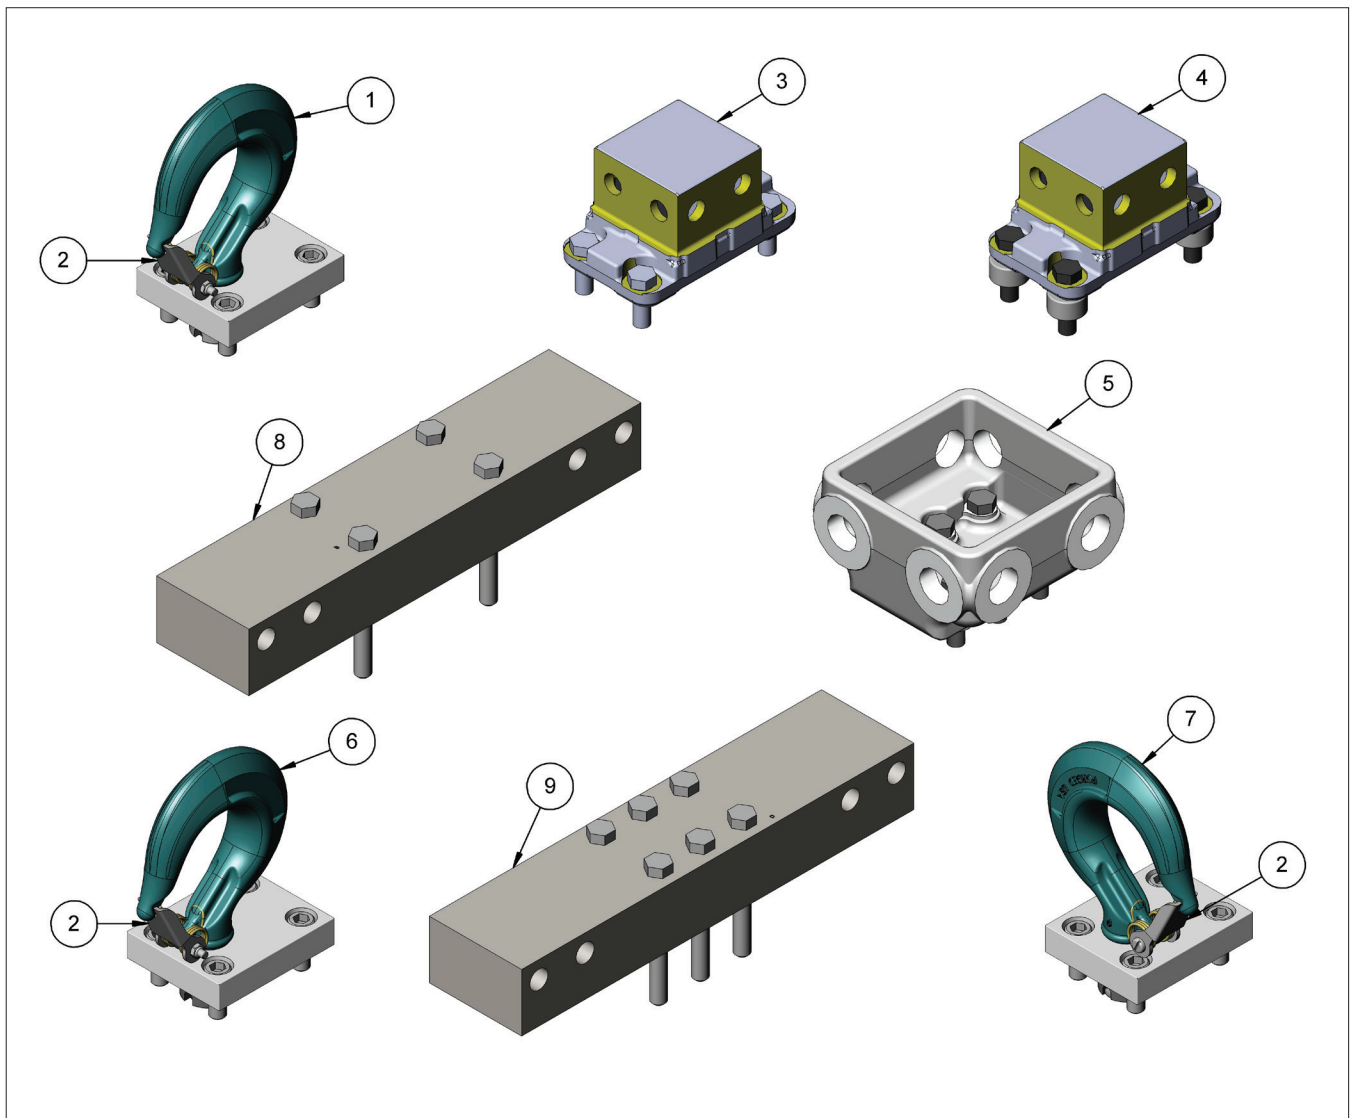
SUSPENSION ASSEMBLY KITS
